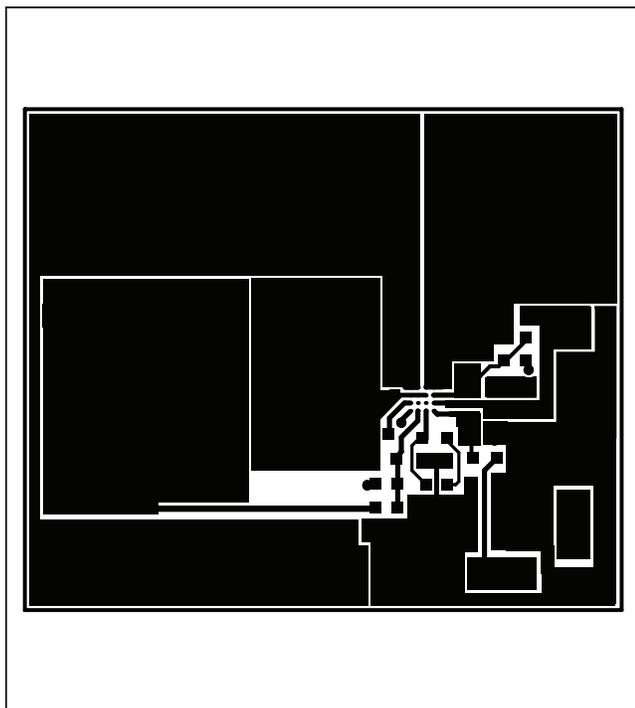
MAX15066 EV Kit PCB Layout—Component Side
